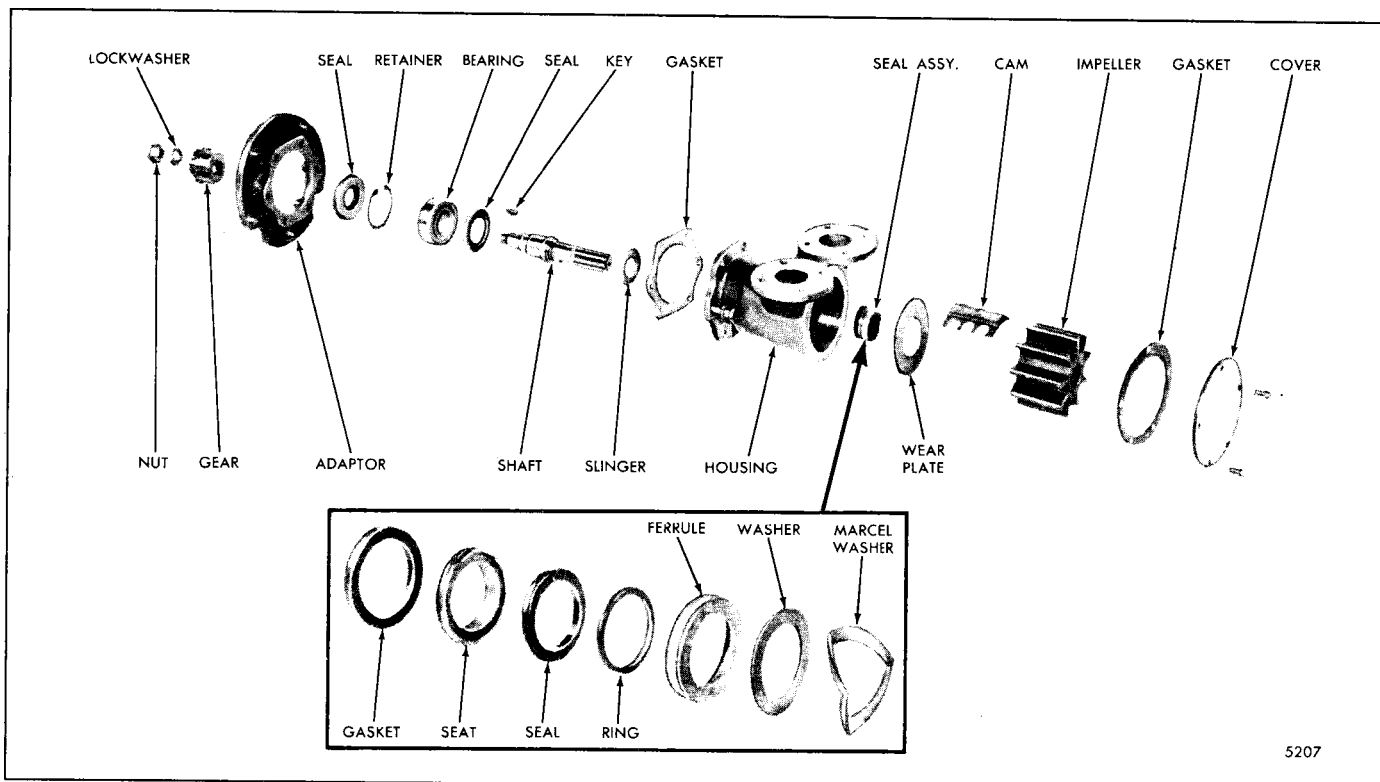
Raw Water Pump Details and Relative Location of Parts (Bronze Cam Design)
